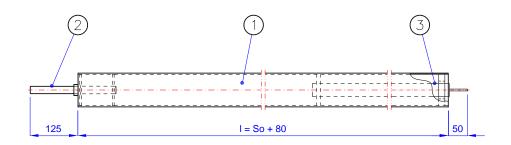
MARC-Ok(st)60-01.02.00 [Winding shaft].
